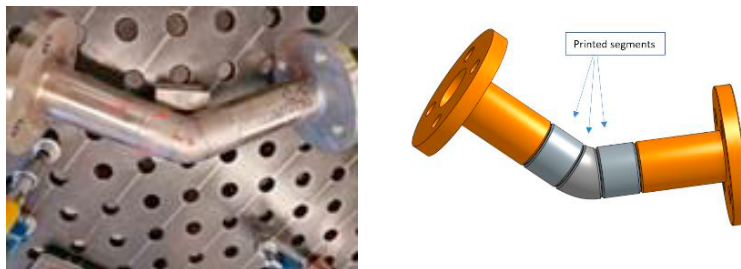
Welding stainless steel seamless pipe pipes and 3D-printed pipes made from 316L stainless steel.
